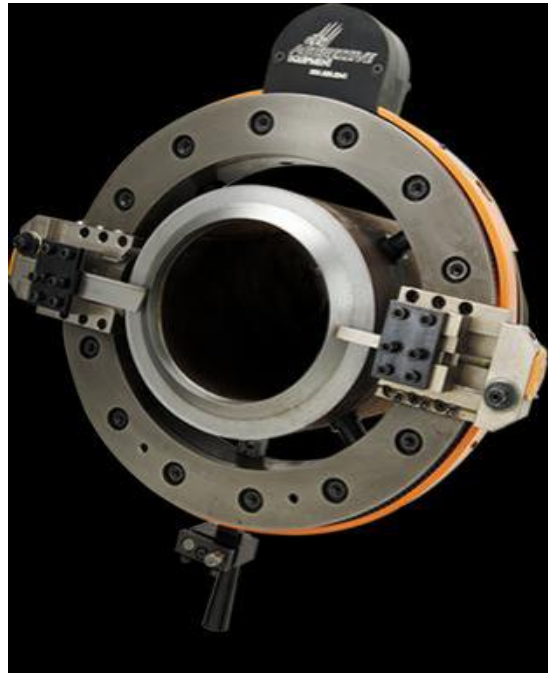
Aggressive Equipment Corporation's Steel Split's Frame® equipment
